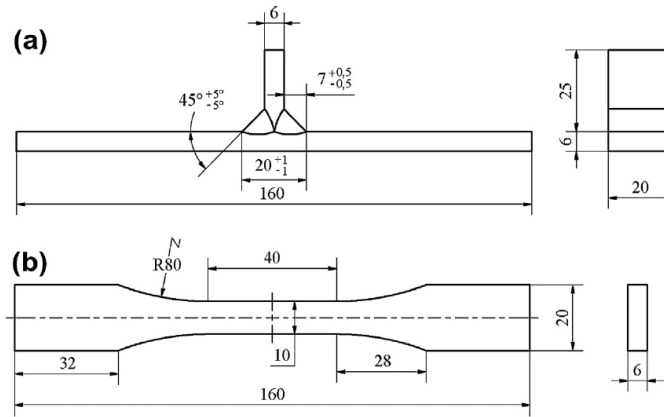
Geometry of tensile and fatigue specimens (dimensions in mm): (a) welded specimens; and (b) base material specimens.
